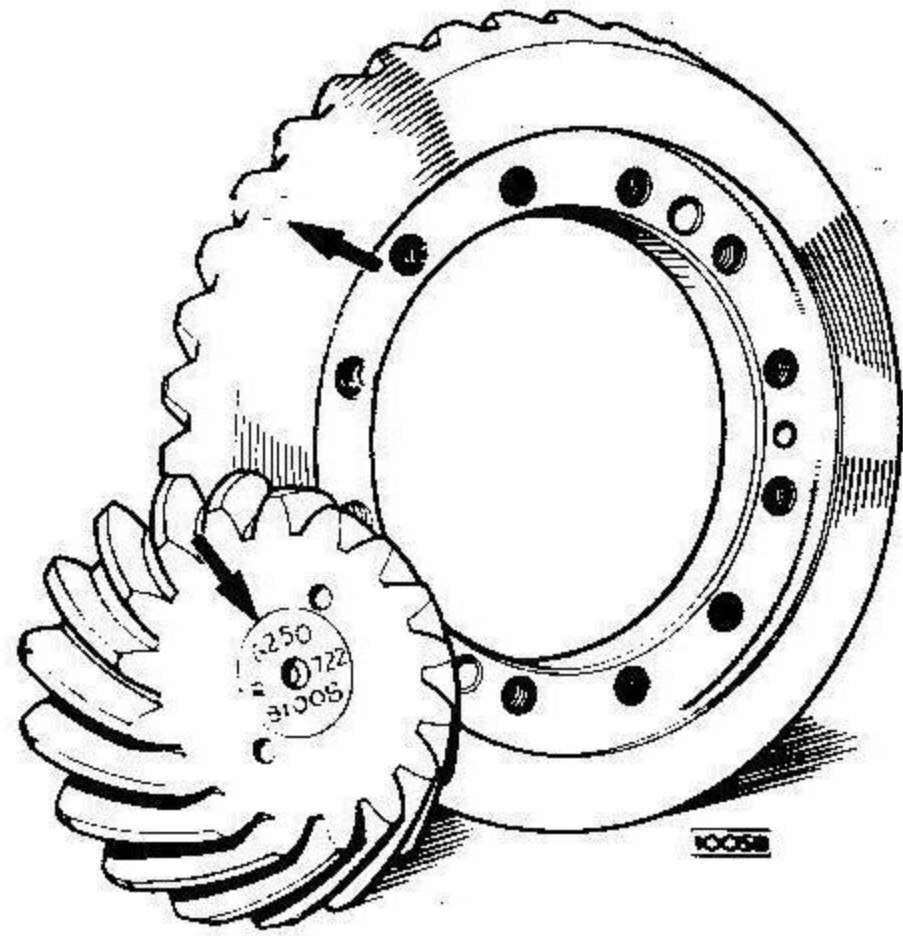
Showing the dimension figure etched on crown wheel and pinion
